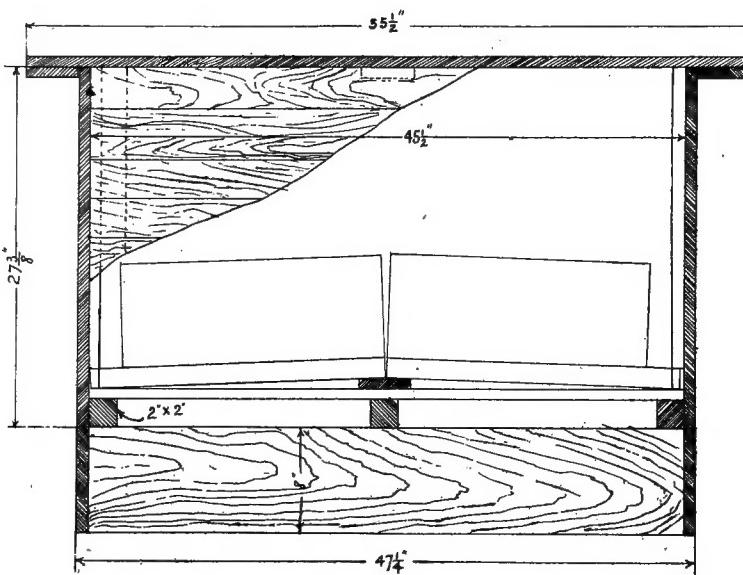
Side elevation of 4-hive Wintering Box, with side cut away to show construction.
